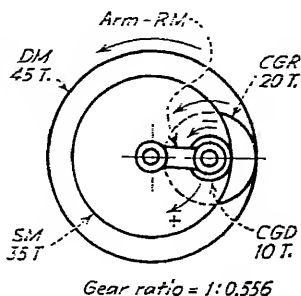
Diagram compound epicyclic drive with two internal gears.
